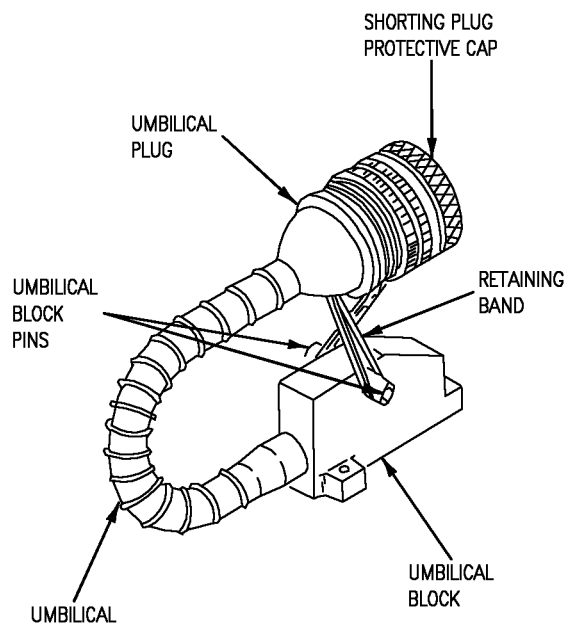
AIM-9L/M Missile Inspection (Sheet 1 of 2)
